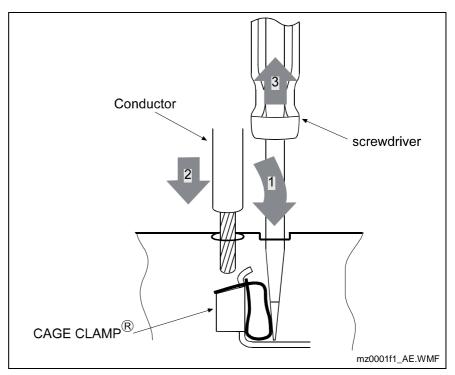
CAGE CLAMP[®] Handling / Attaching a Conductor
